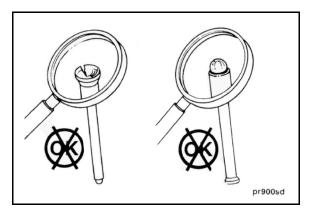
CHECK THE PUSH TUBE BALL AND SOCKET FOR SCORING AND CRACKS
